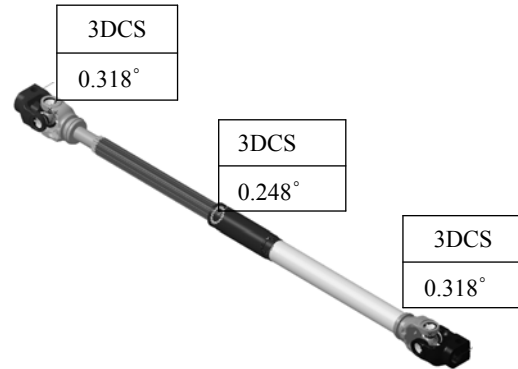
Tolerance analysis of universal joint assembly²
